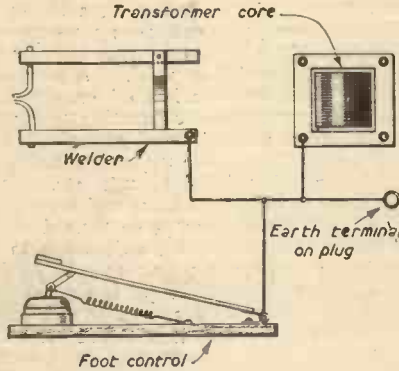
The connections for earthing the welder and the foot pedal.
